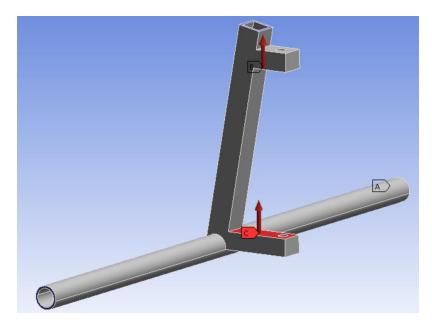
ANSYS Screenshot of Where the Loading Occurs on the Spindle Mount for the Steering System Due to its Contact with the Wheel Spindle.
